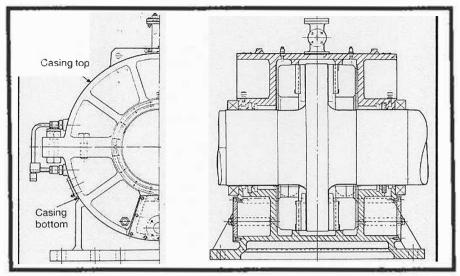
Concentric cylinder casing structure of a modern naval thrust bearing
